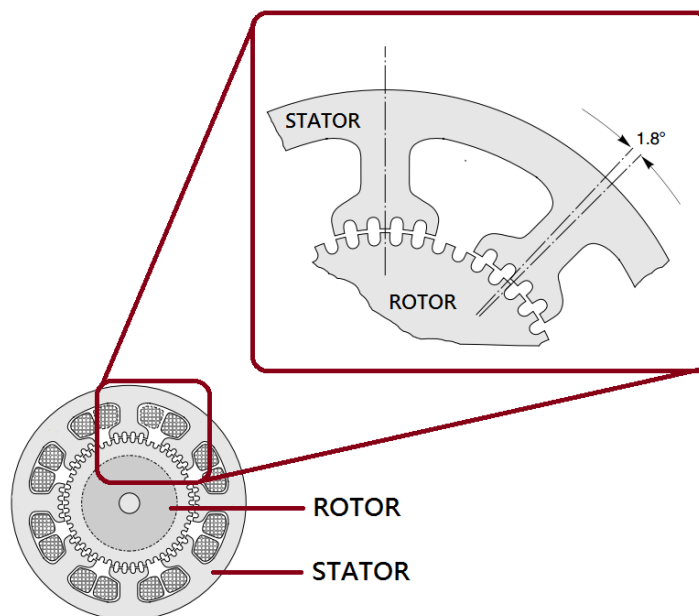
Cross section and detail diagrams of a 1.8° step hybrid stepper motor.
